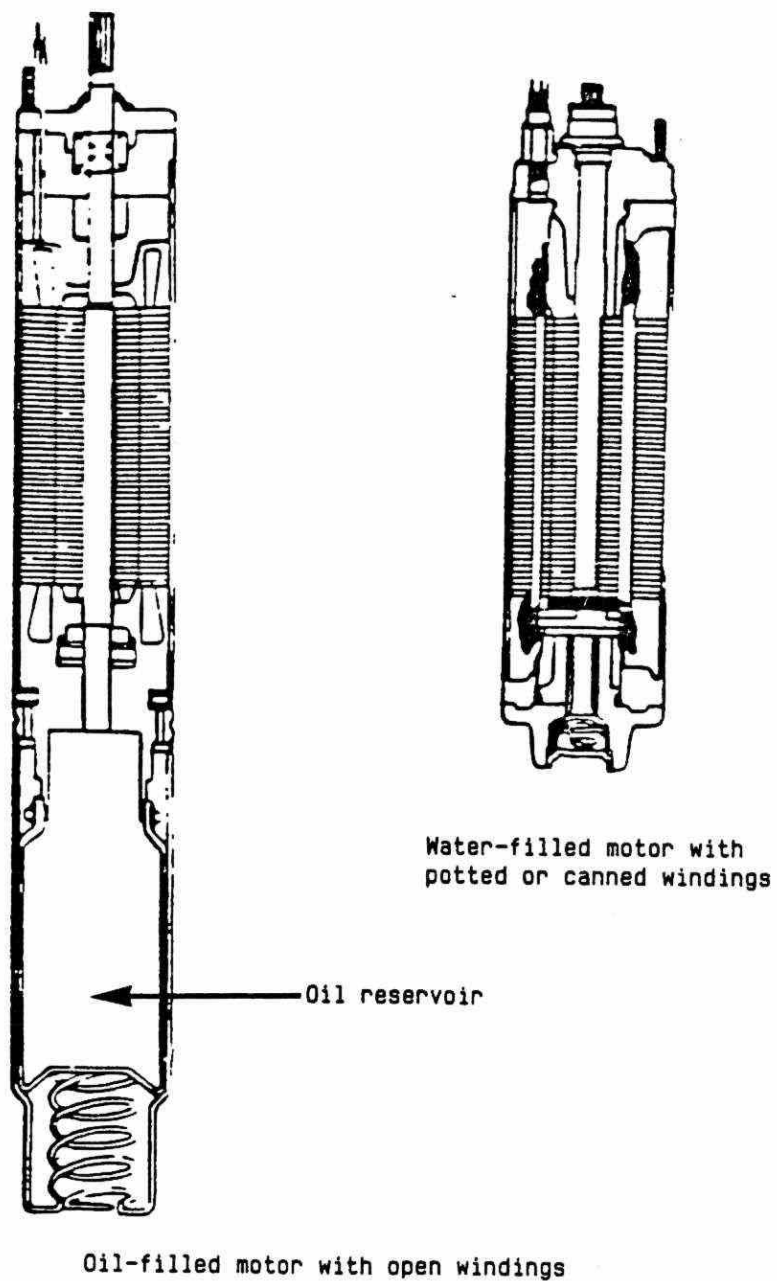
Views of oil-filled motors with open windings and water-filled motors with potted or canned windings.
